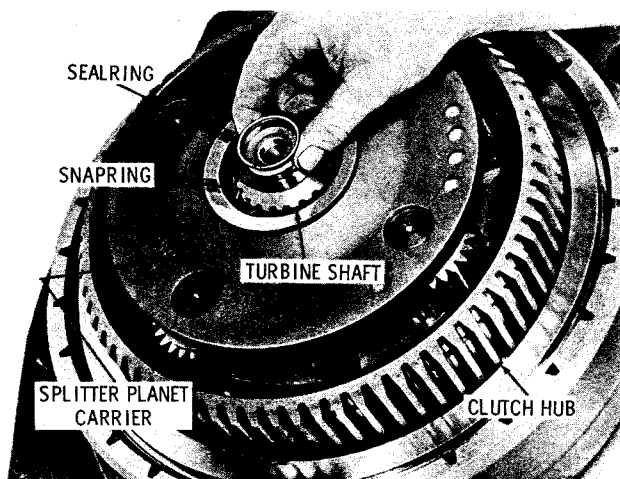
Removing hook-type sealring from rear of turbine shaft (CBT, CLBT, VCLBT)
